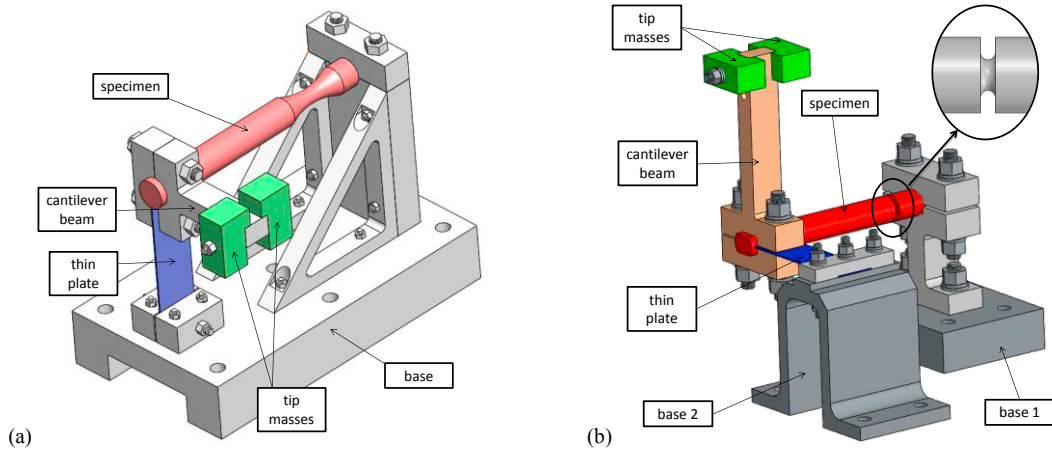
Proposed testing system: (a) preliminary layout; (b) improved layout.
